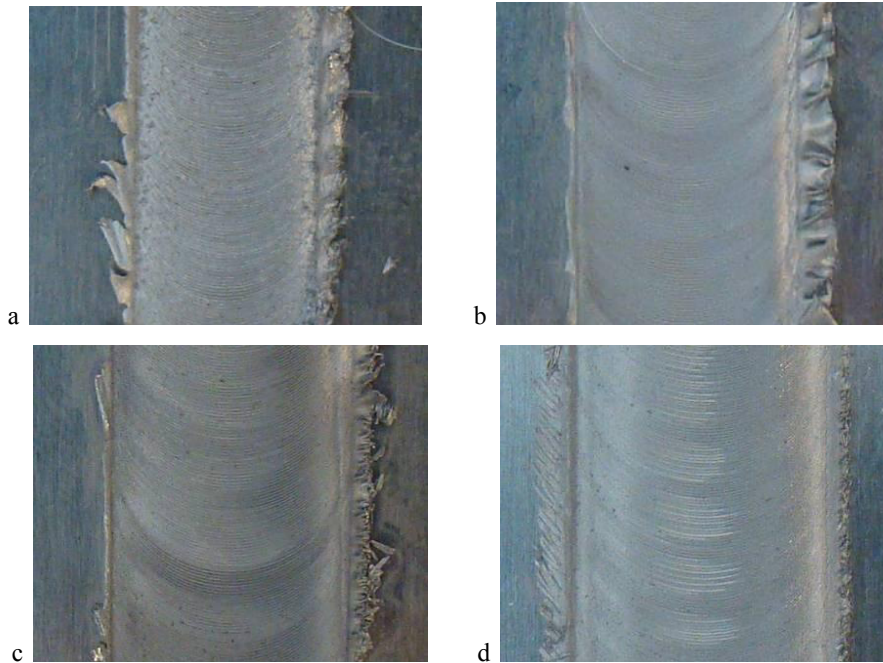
Surface appearance of FSW welded samples with different D: (a) D10; (b) D12; (c) D14; (d) D16.
